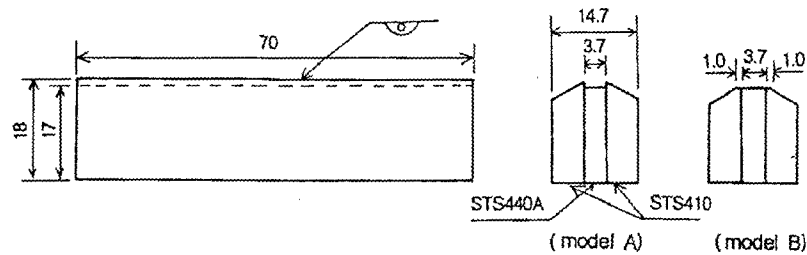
Specimens for edge joint by TIG melt run welding
